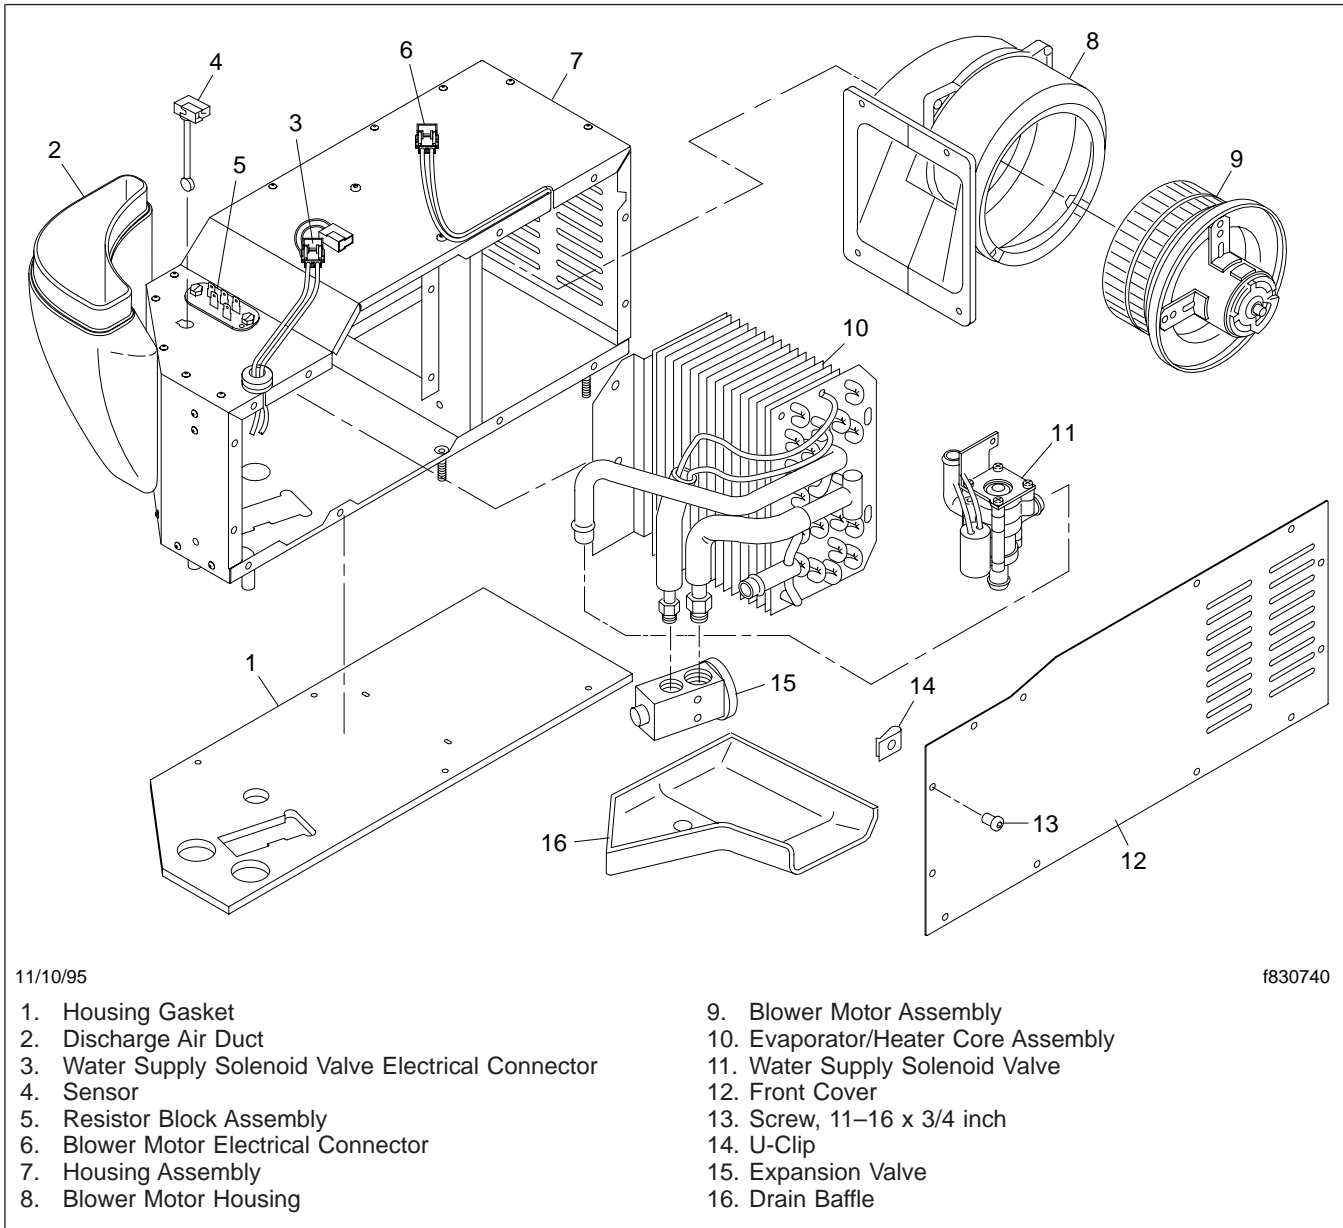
, Sleeper Heater and Air Conditioner Assembly
